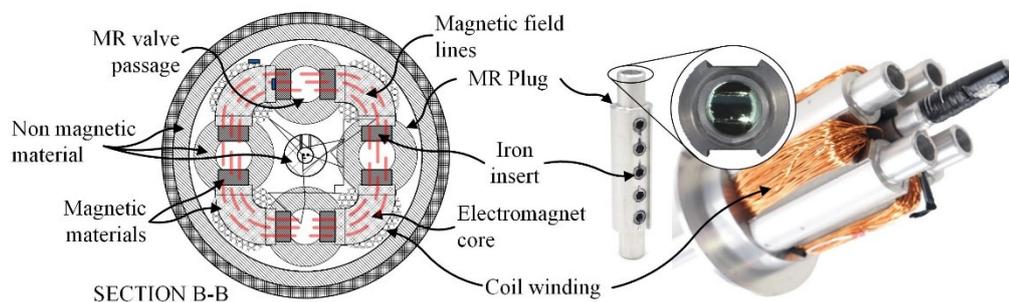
MRP head showing inner toroidal array and its top section schematic
